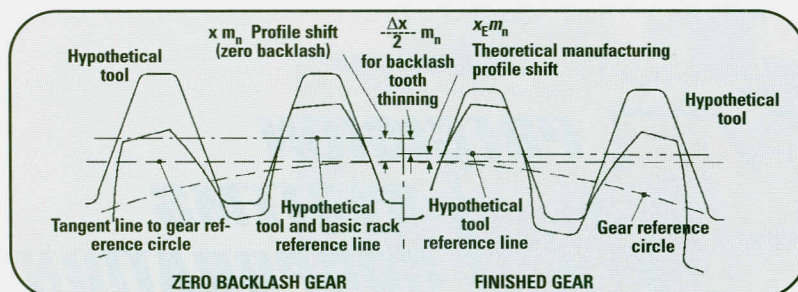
Hypothetical tool with zero backlash and finished gear (©AGMA)
